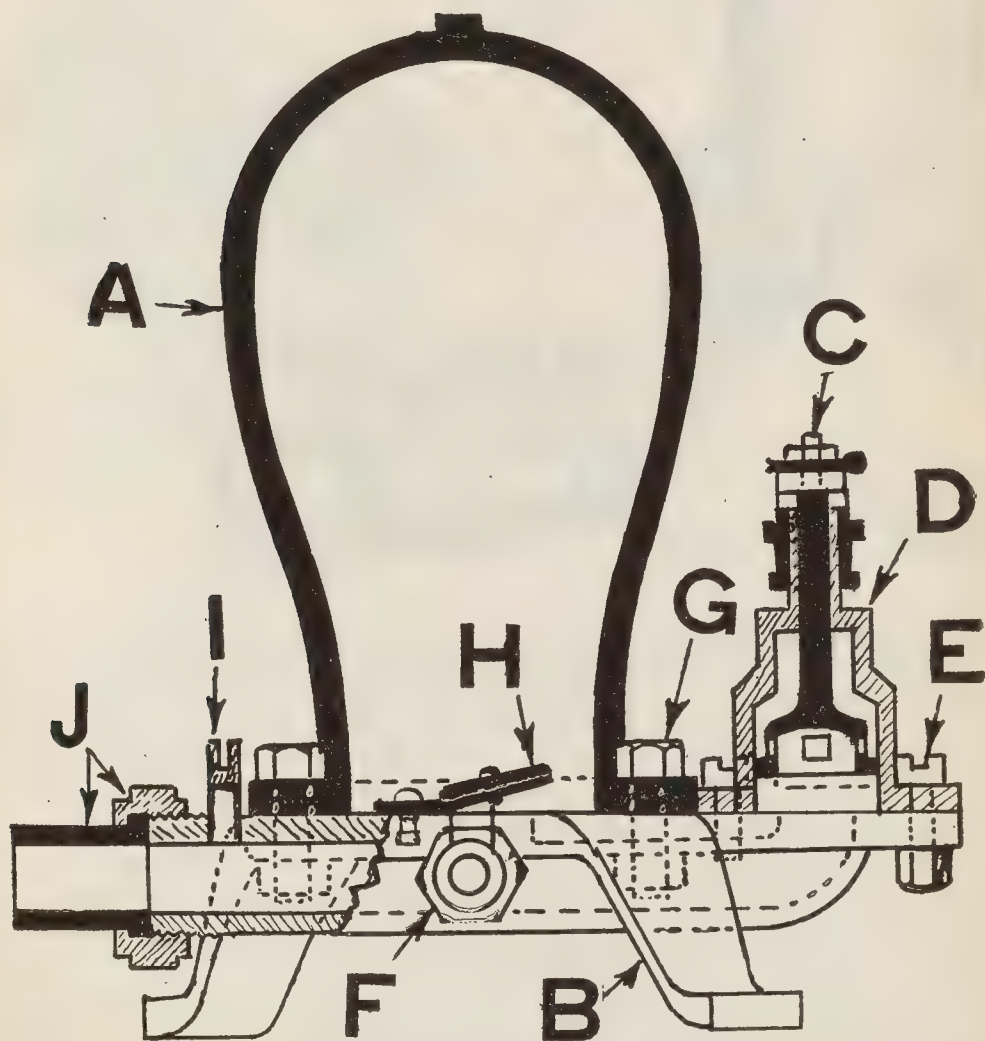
,850.—Sectional view of Rumsey ram. *The parts are*, A, air chamber; B, base; C, impetus valve; D, valve case; E, case screw; F, discharge nut and tube; G, air chamber bolt; H, check valve; I, snifting valve; J, drive nut and tube.
